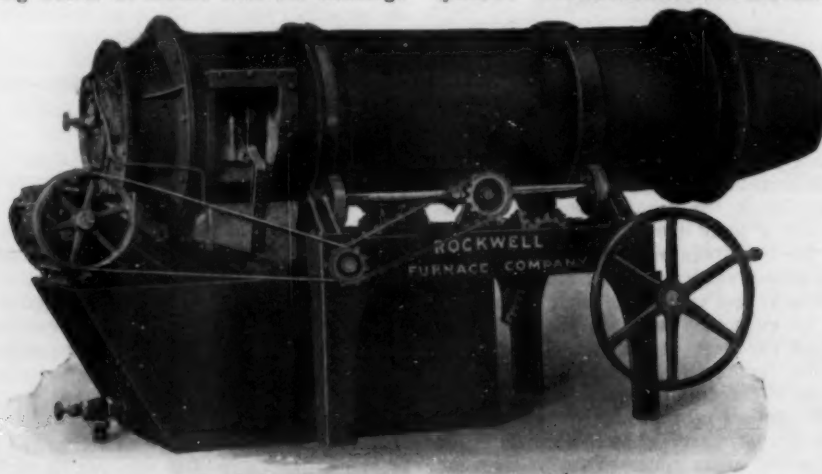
ADJUSTABLE AUTOMATIC ANNEALING AND HARDENING FURNACE.
